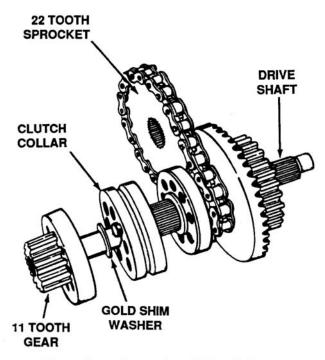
Removing 11 Tooth Gear, Shim Washer and Clutch Collar
